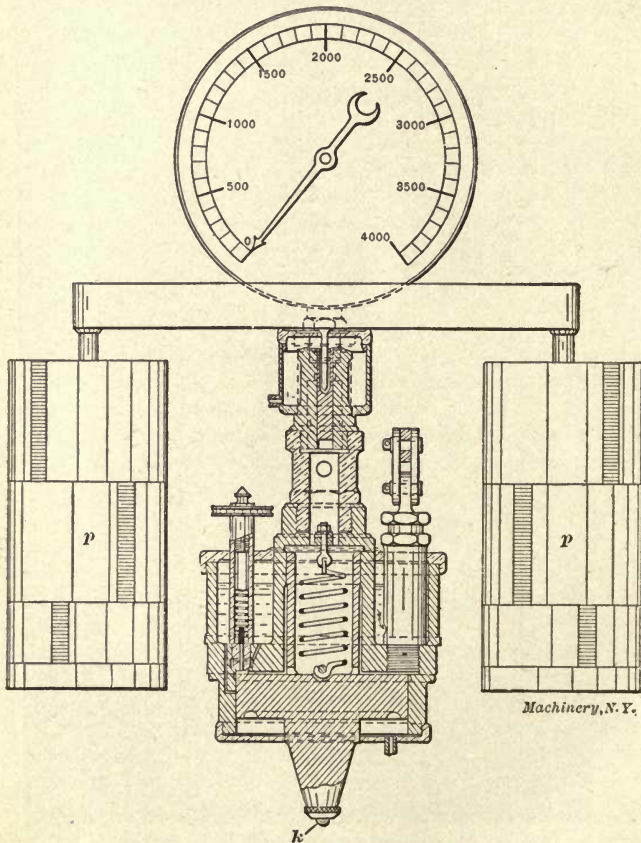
Section of Press Cylinder of Machine in Fig. 4
